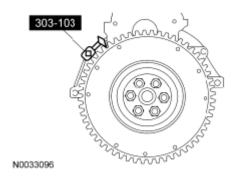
Installing Flywheel Holding Tool Courtesy of FORD MOTOR CO.
